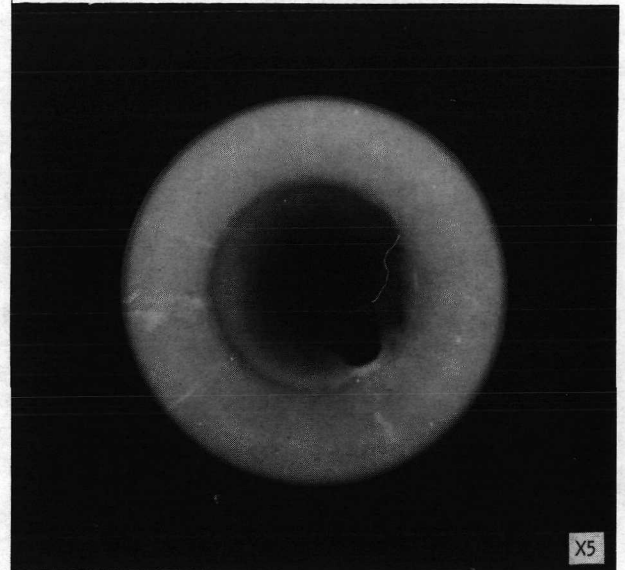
Ruptured weld joint between bottom end cap and cladding sleeve. End cap was arc-cast tungsten and cladding was chemically vapor deposited tungsten. (Reduced 8 percent in printing.)
